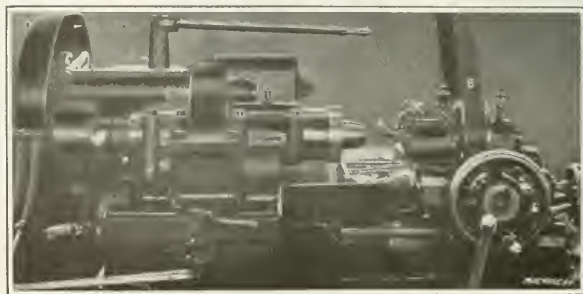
Milling Threads in Nose in a Special Lees-Bradner Thread Milling Machine
